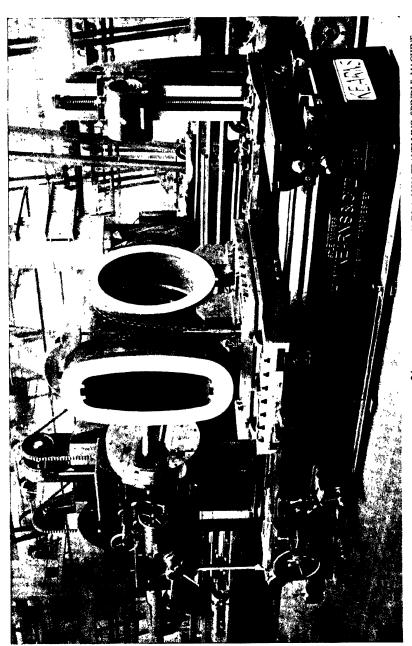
Boring the wedge-ring seatings on a 24-in, water-sluice valve body in a non-travelling spindle machine
